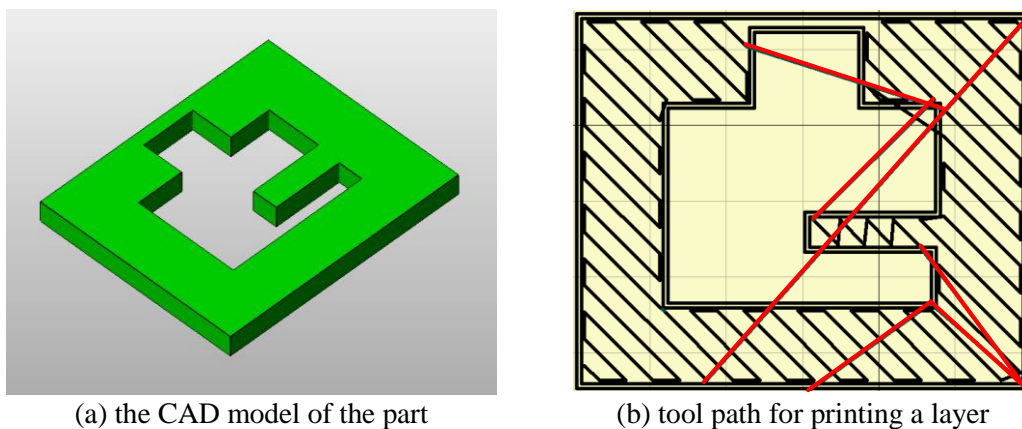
Zig-zag tool path strategy for printing a layer
